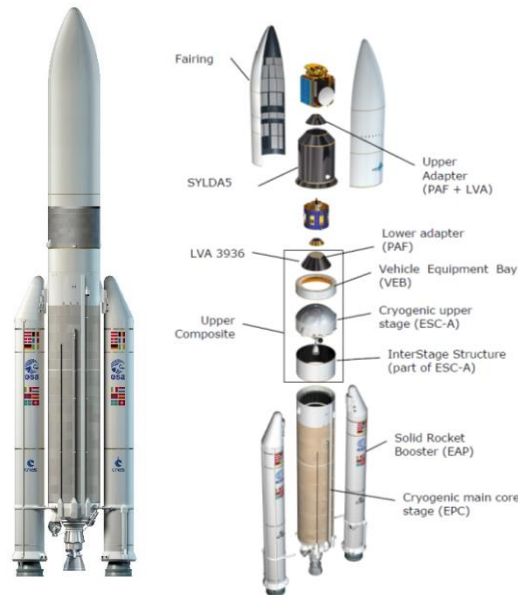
Close-up (on left) and exploded view of the LV (on right) [Ref.30]
